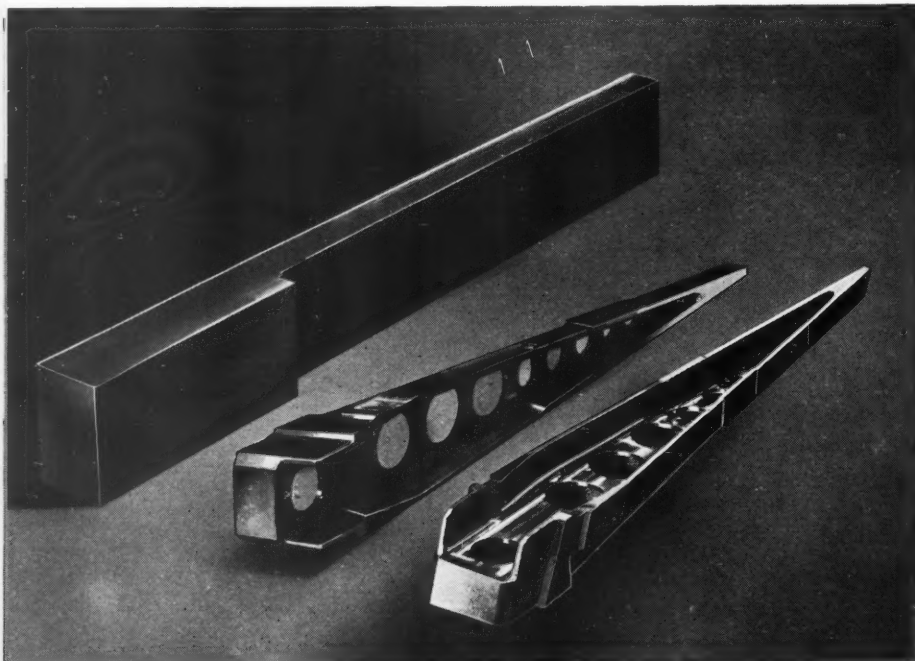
Titanium fittings machined in shape of tapered channels from annealed hand-forged bar stock
